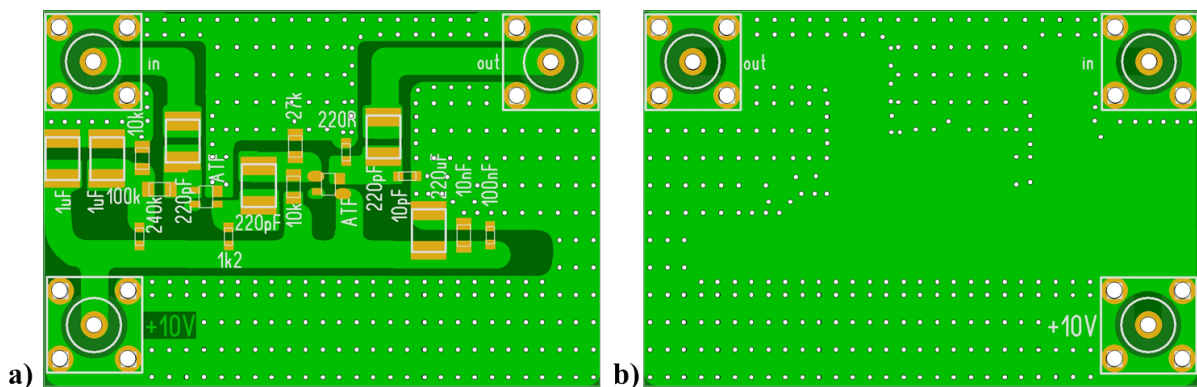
NCP's split gain network PCB layout design: a) top view; b) bottom view
